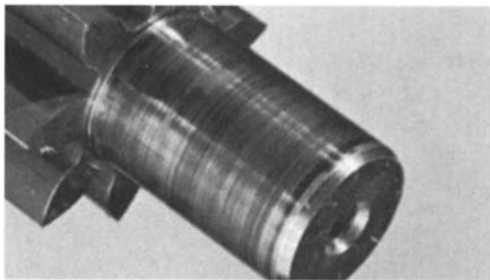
Black coloration of gear and shaft due to excessive overheating of the oil (>300°F). This part is not usable. (Courtesy of Dana Corp.)
